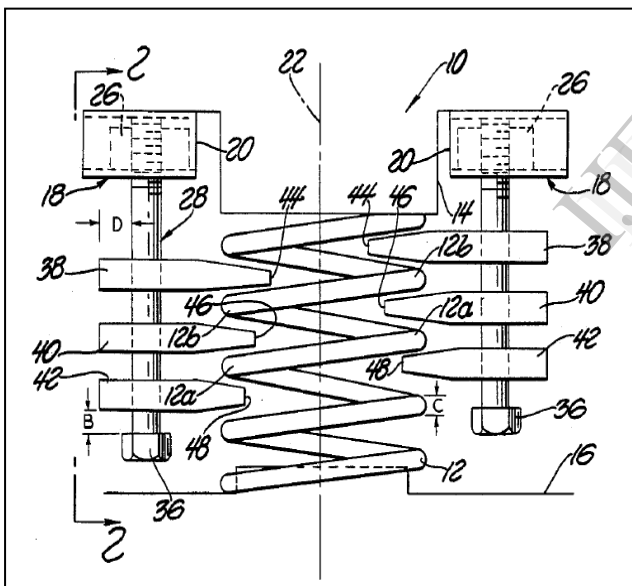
Coil Spring Suspension with Tapered Plates [11]
